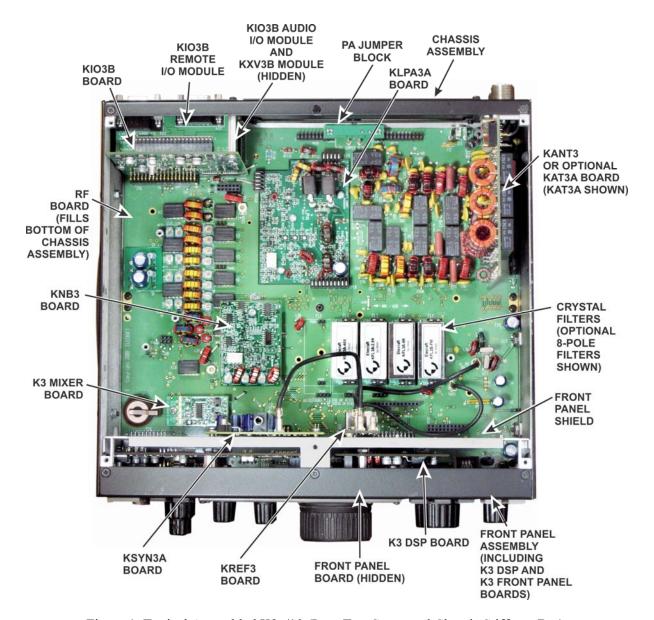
Typical Assembled K3s/10 (Less Top Cover and Chassis Stiffener Bar).
